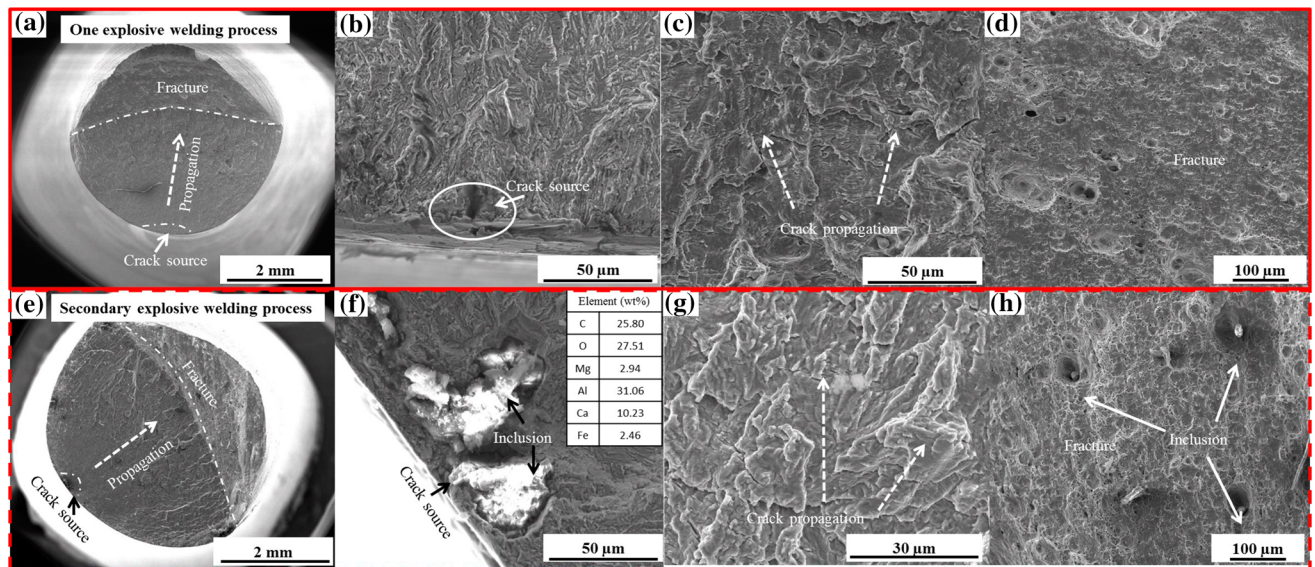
Fractography of the base material 10CrNi3MoV steel after fatigue tests: (a) one explosive welding process; (b) through (d) crack initiation and propagation until fracture for the specimen in (a); (e) secondary explosive welding process; (f) through (h) crack initiation and propagation until fracture for the specimen in (e).
